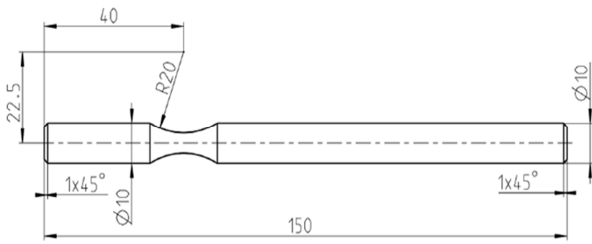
Shape and dimension fatigue test specimen (dimension in mm)
